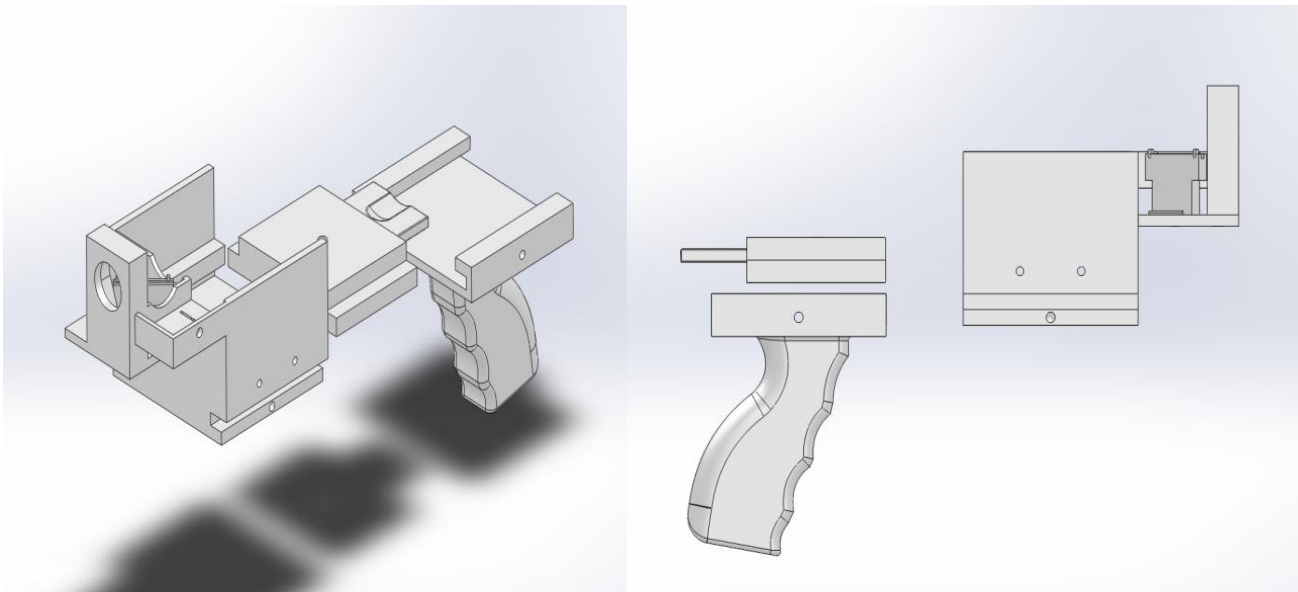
Isometric, back, and side views of the dovetail sliding mechanism.
